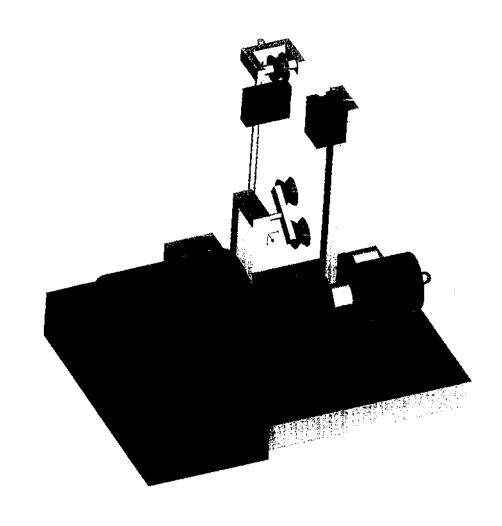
MACHINE SET UP WITH THE REMOVER.
